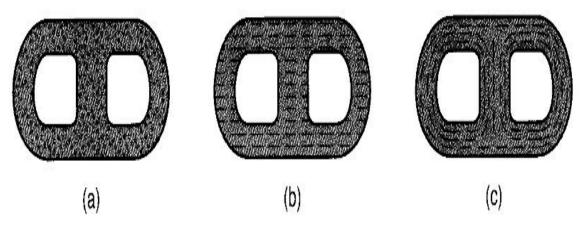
Flow Lines (a) Casting (b) Machining (c) Forging
